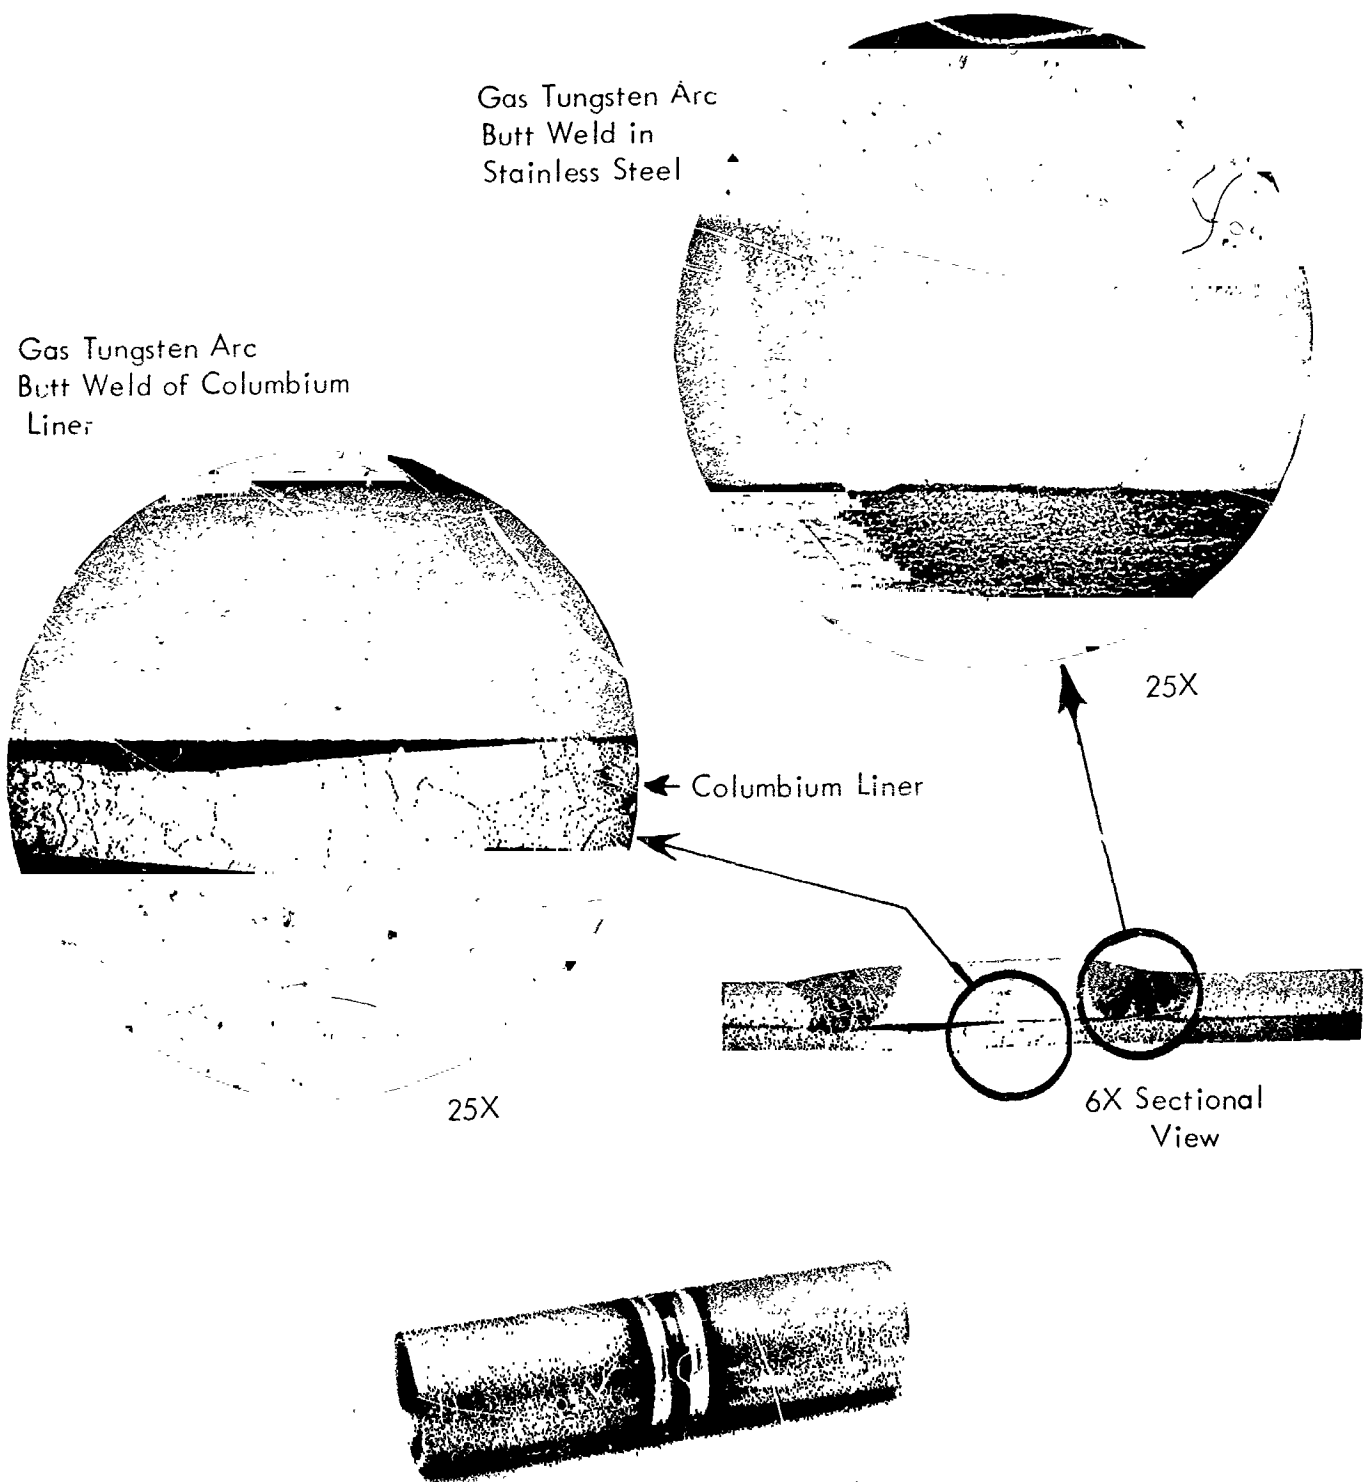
Double Girth Butt Weld - Section View
